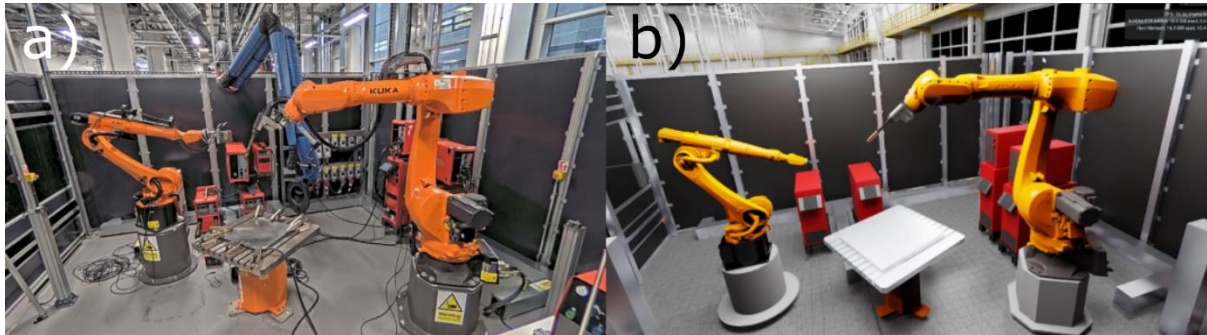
Physical manufacturing cell (a) and digital twin of manufacturing cell (b). Robot fitted with laser scanner (left) and welding torch (right) will manufacture the part on the build plate (centre).
